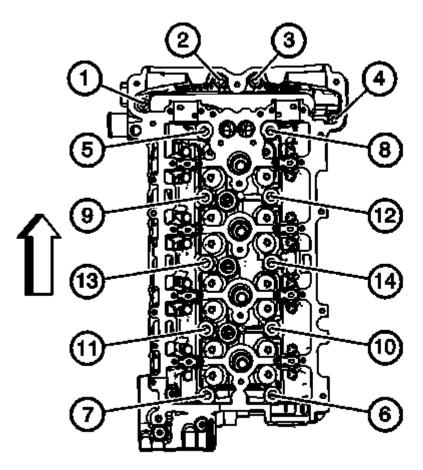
Cylinder Head Block Bolts Removal Sequence Courtesy of GENERAL MOTORS COMPANY
